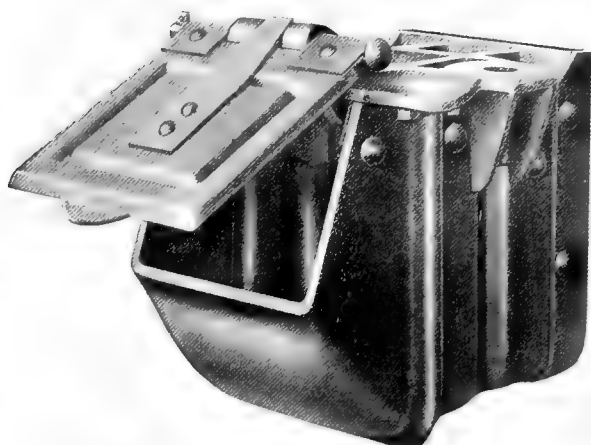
Kensington Steel Journal Box with Outside Lid Spring.
